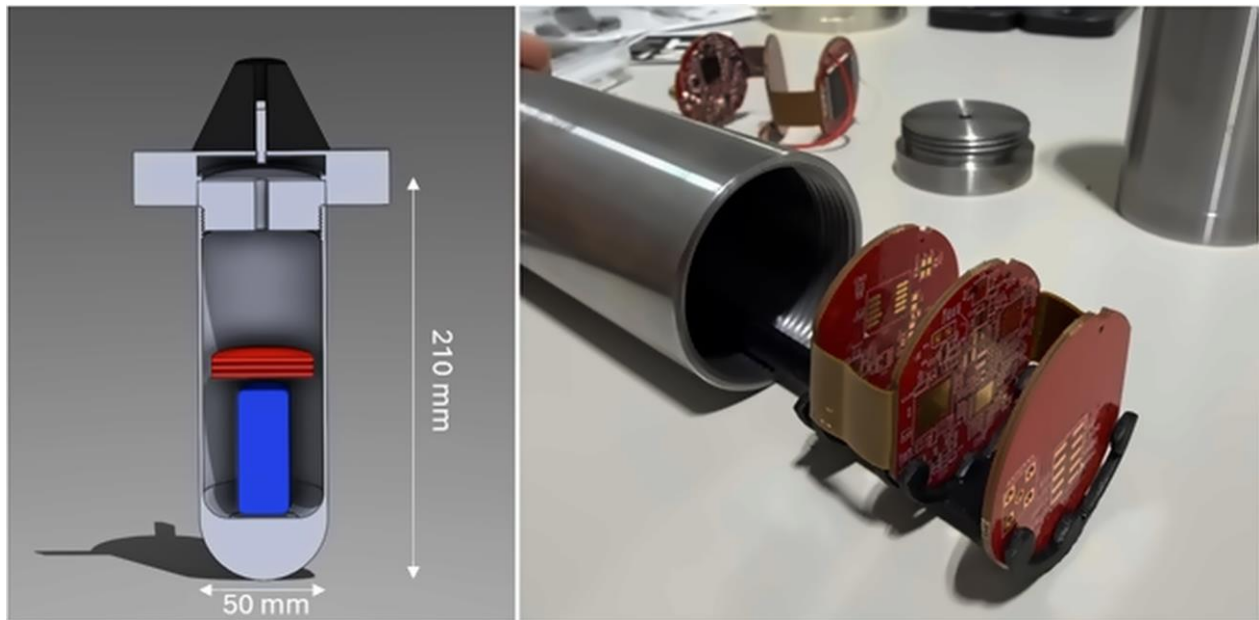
Concept art showing a cross-section of the field-ready IMPRESS-345 penetrator platform with rechargeable Li-ion 18650 battery (blue) and PCB (red). For impact testing, the cavities will be filled with potting resin (left). A photograph of the printed circuit board assembly within the penetrator. The Mars-ready probes will use custom disc batteries (with or without thermal insulation (see Section 3.2.2) and more tightly packaged PCBs, maximizing continuous payload volume.
